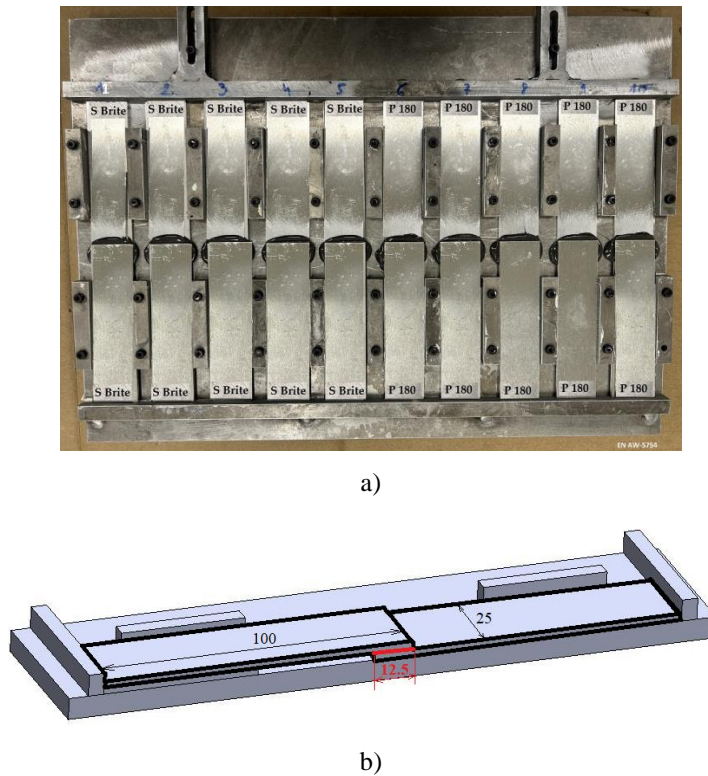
Mould for bonding (a) and dimensions of the test specimens for the single lap-shear test (b)
